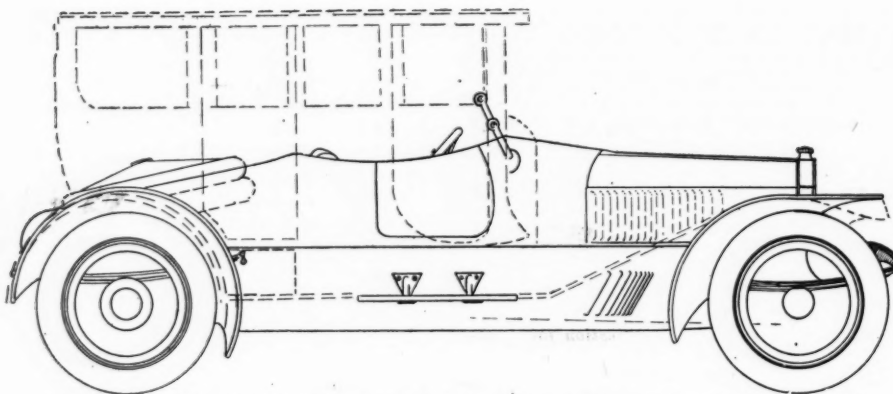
Suggestion for converting 1912 Winton touring car into roadster, with extra wheel on rear
